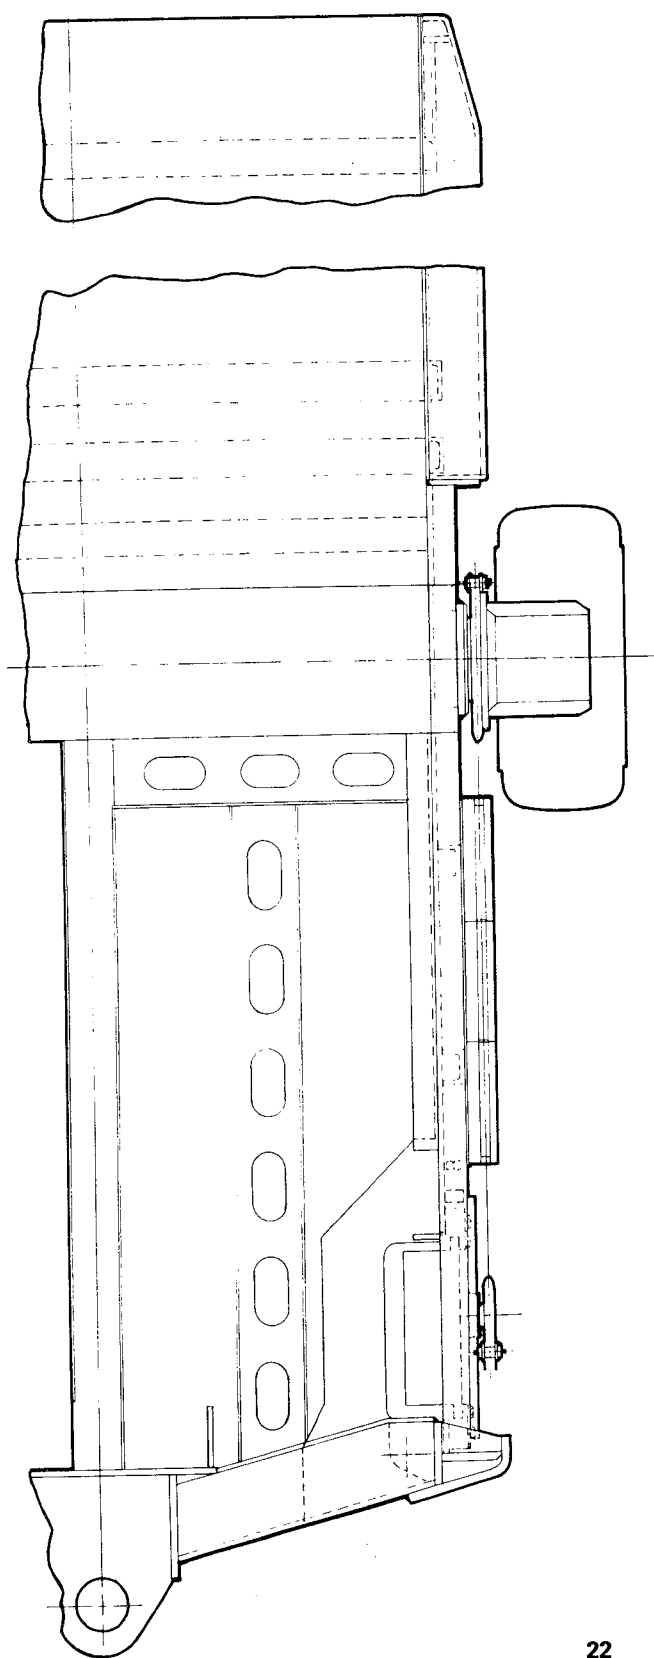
TRAILER DRIVE TRAIN ASSEMBLY
